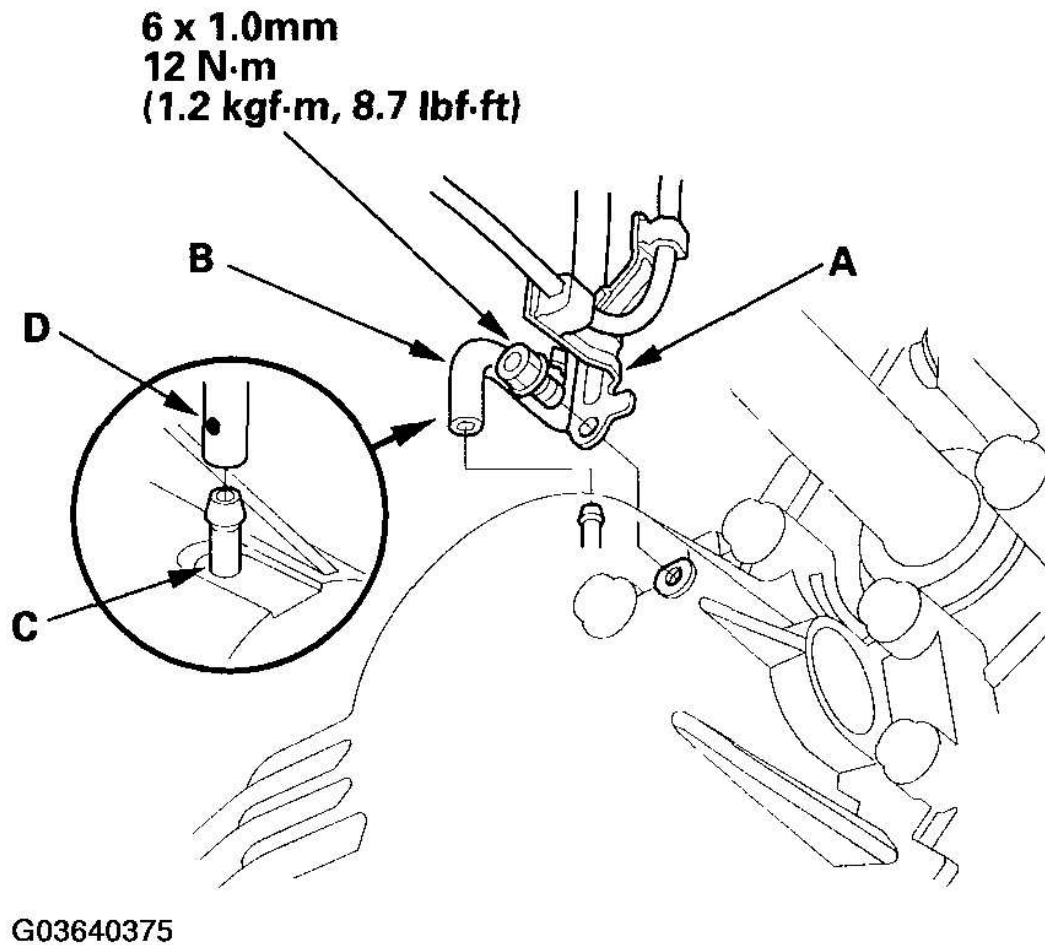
Installing Breather Tube Over Breather Pipe With Dot On Tube Facing Out
